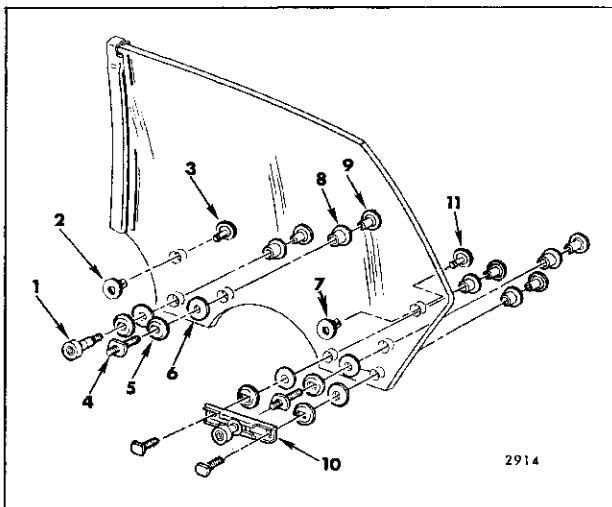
Rear Door Window Assembly - "A-39" Styles
